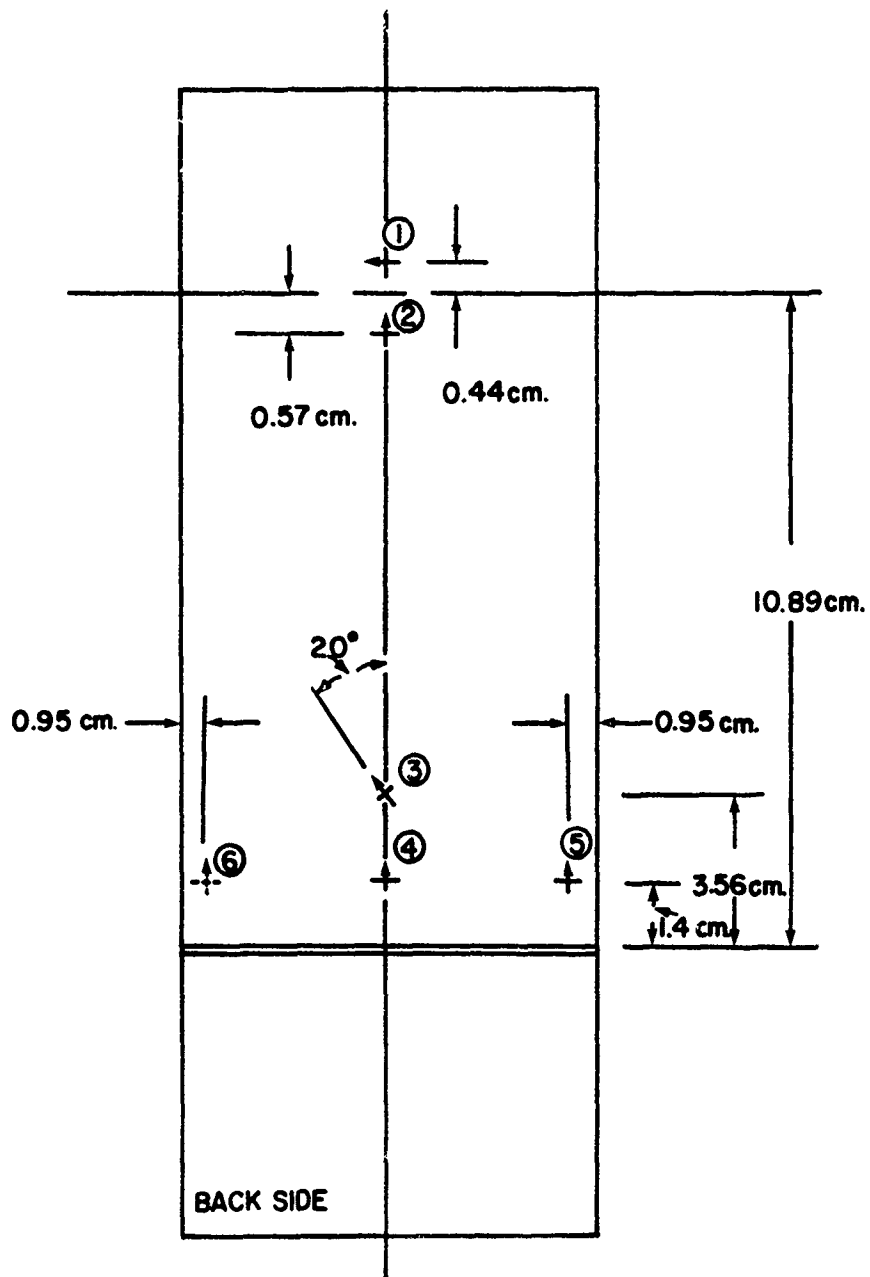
A. Strain Gage Locations for Group 4 Structural Element Test Specimens.
